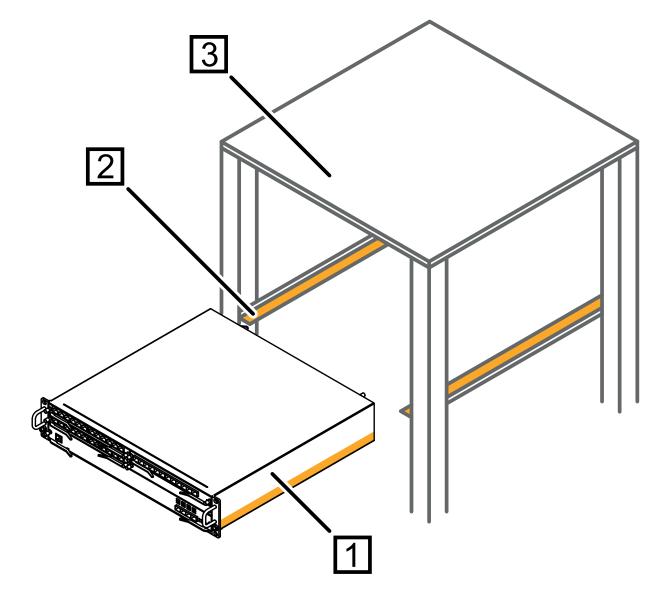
Assembly in a switch cabinet with sliding/mounting rails
